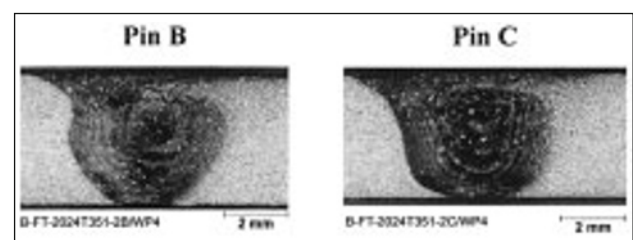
Weld macrographs produced when using tool pins B and C in conjunction with shoulder 2
